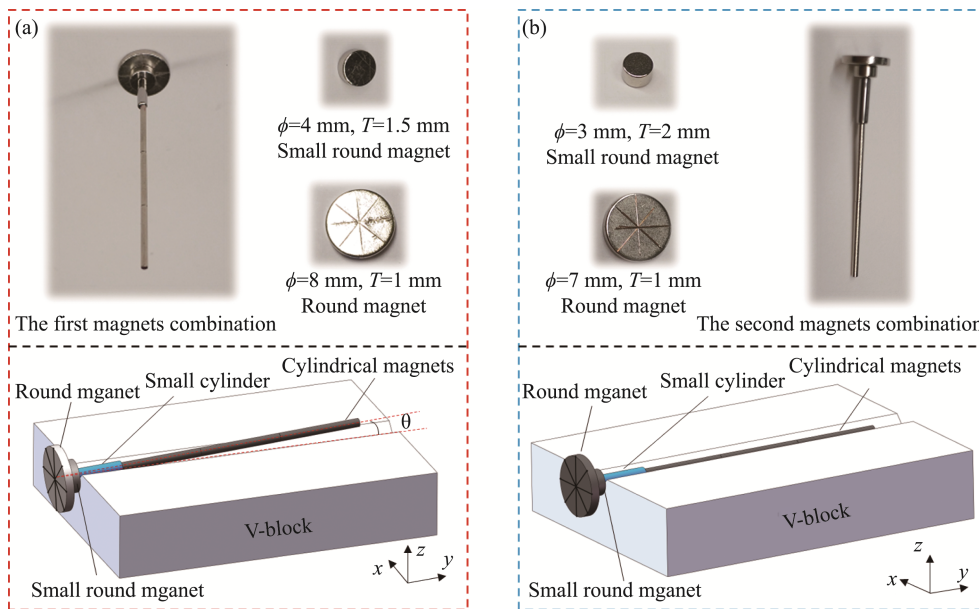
Magnets Combination Jigs for the Alignment of a Small Cylindrical Workpiece
